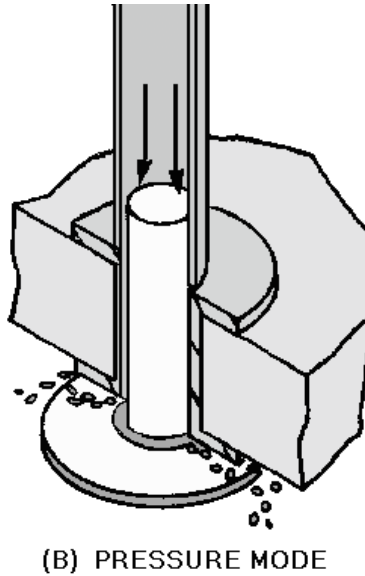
B.—Motorized vacuum/pressure solder removal. PRESSURE MODE.
